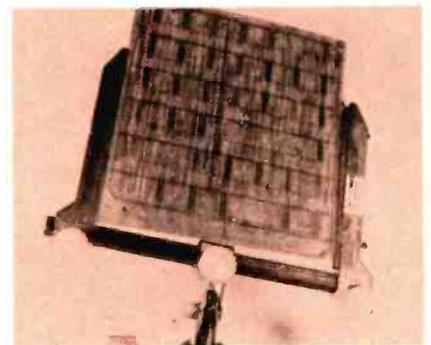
CIRCUIT BOARD HOLDER makes desoldering task easier.
